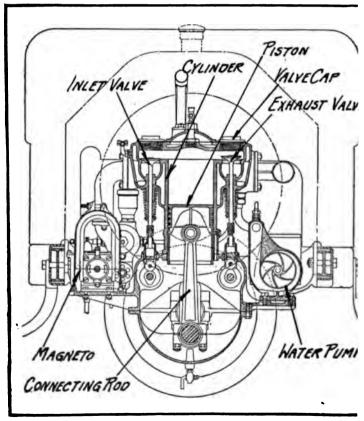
Front Sectional View of Locomobile Pour Cylinder M
